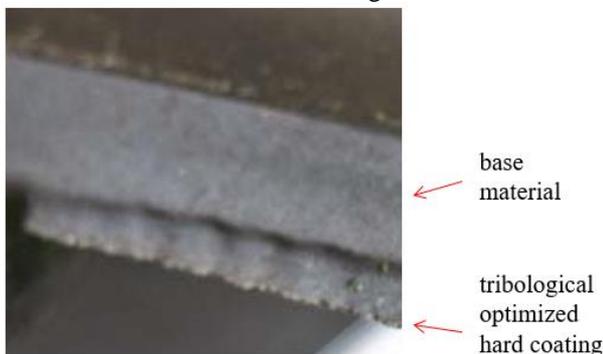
Wolfram carbide coated mower blade after 50 hours in field. The base material shows wear. Because of lower wear on carbide cutting edge, a new cutting edge is exposed. Cutting edge stays sharp.
